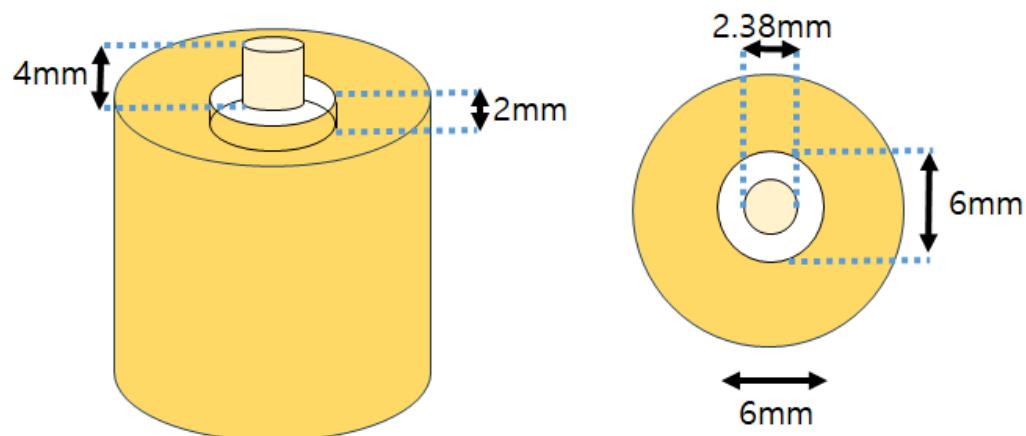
Design of the specimen fabricated using a cylindrical polypropylene mold and specimen.
